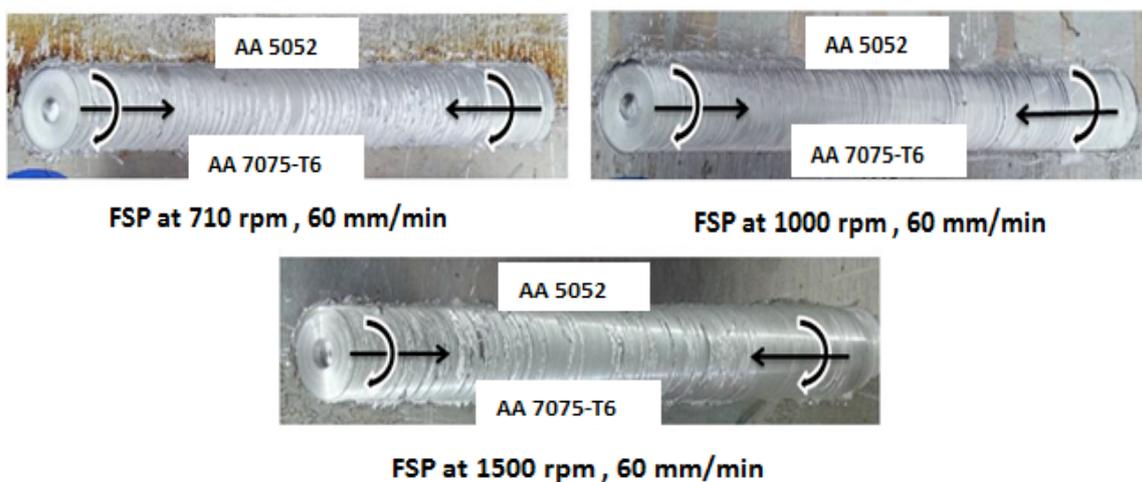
Welding Line Surfaces for All FSP Specimens
